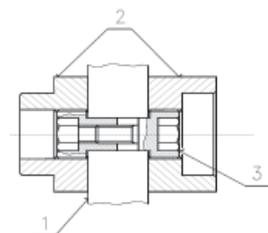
Fastening the pair welding adapters using the threaded brass quick-coupler
